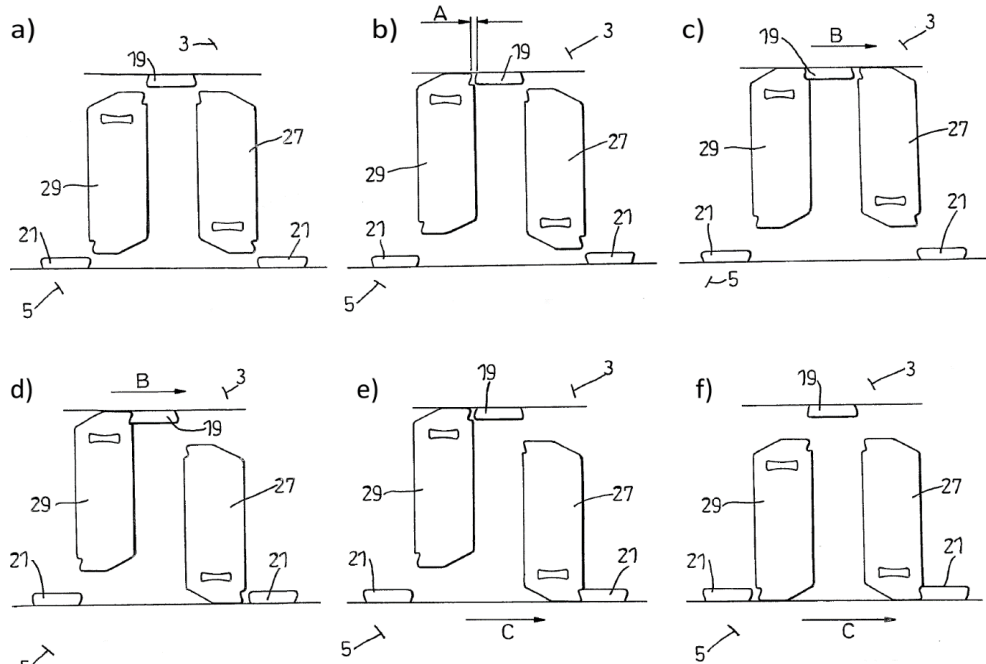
Zeroshift – detailed view of the gearshift process [35]
